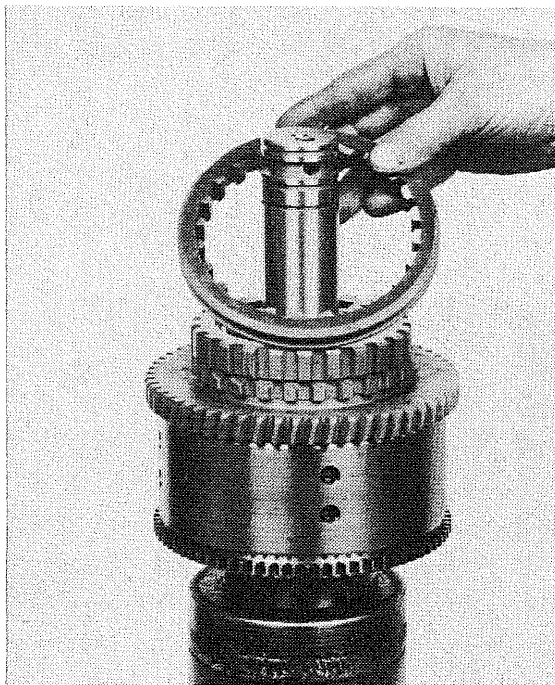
Disassembly of the PFR Clutch (2 of 4)
